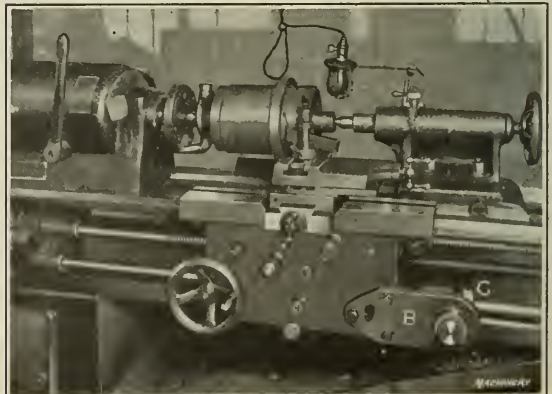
Cutting Oil-grooves in Upper Index Wheel in a Lathe
